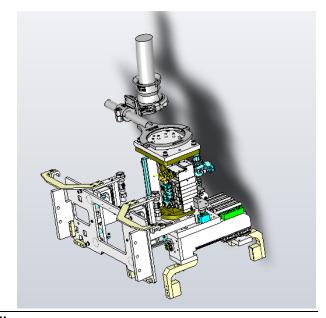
An illustration of the Press Load Robot end of arm tooling.
